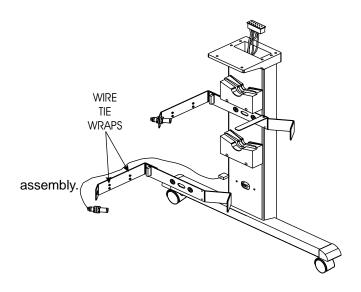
Media Take-Up and Feed Sensor Removal.
